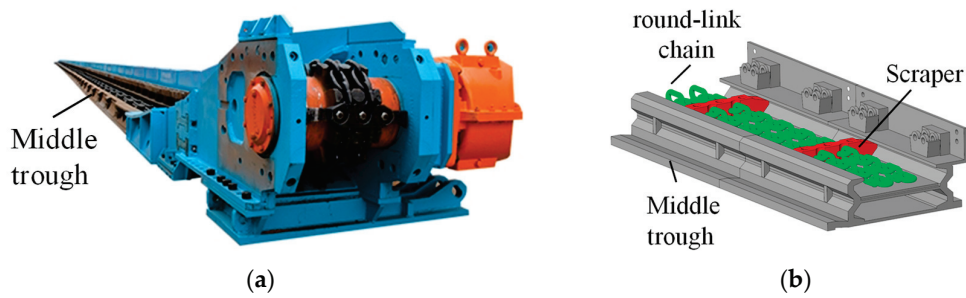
Chain drive system of scraper conveyor: (a) Physical object of the scraper conveyor; (b) scraper chains model.
